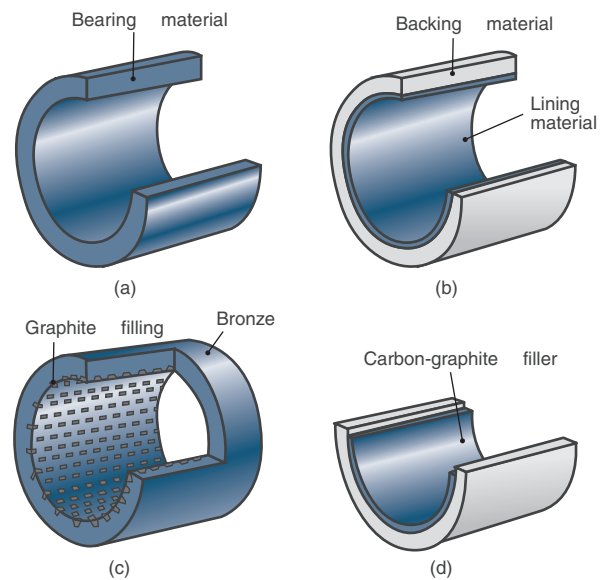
Different forms of bearing surfaces. (a) Solid bearing; (b) lined bearing; (c) filled bearing; (d) shrink-fit bearing.
